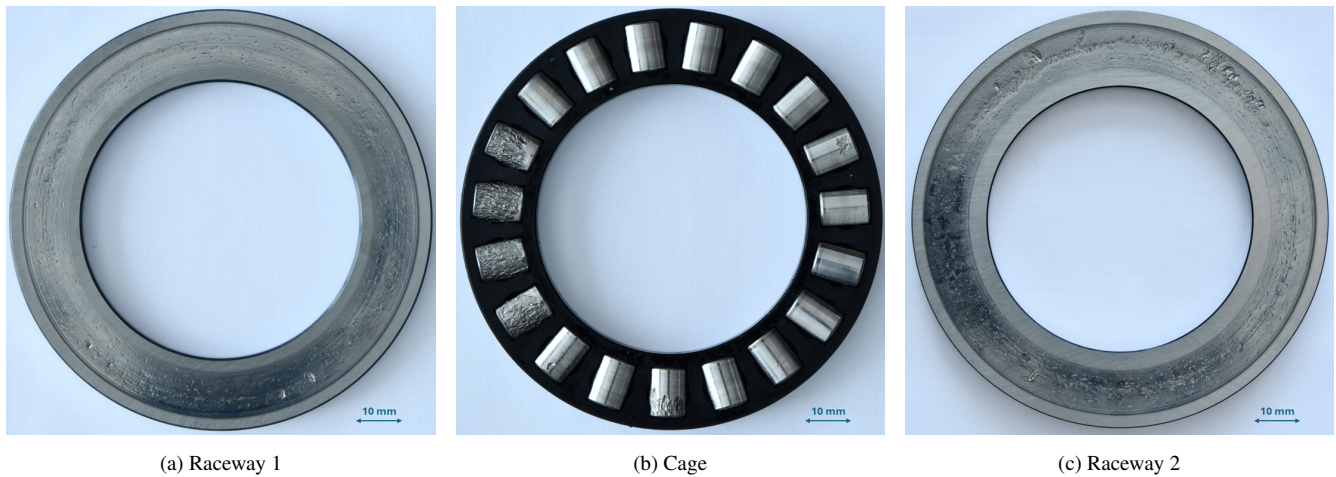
Pictures of bearing components for Bearing 1 of T02. Refer to Table 5 for designation of tests. The outer diameter of the bearing is 95 mm and the diameter and length of the rollers are both 11 mm.
